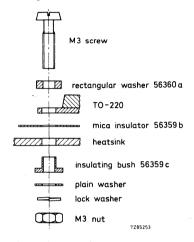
Insulated screw mounting with rectangular washer. Known as a "bottom mounting".
